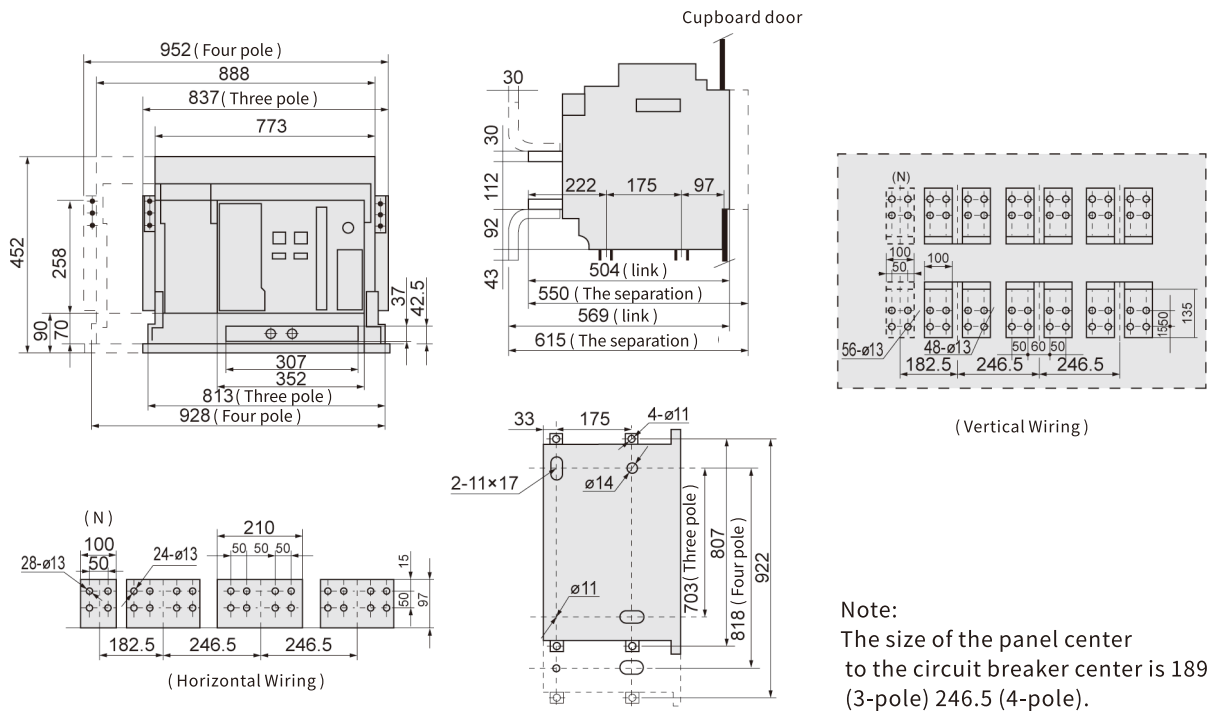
Outline and installation dimensions of drawout type circuit breaker (EKA1-6300, 6300/4 In=4000, 5000)
